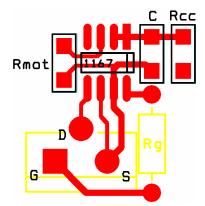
Single side board, TO220 MOSFET, OVT to VCC, solder side view, through hole gate resistor.
